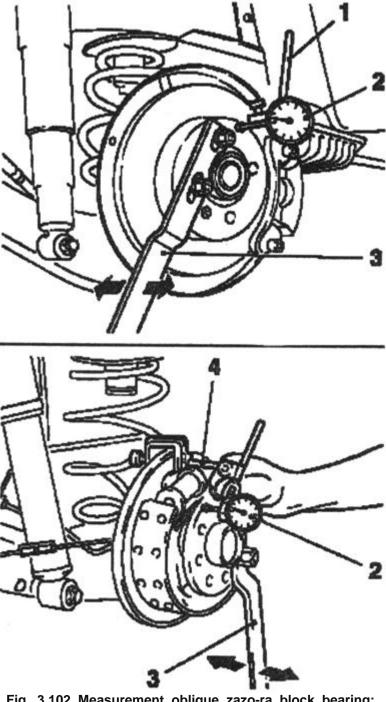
Measurement oblique zazo-ra block bearing:
